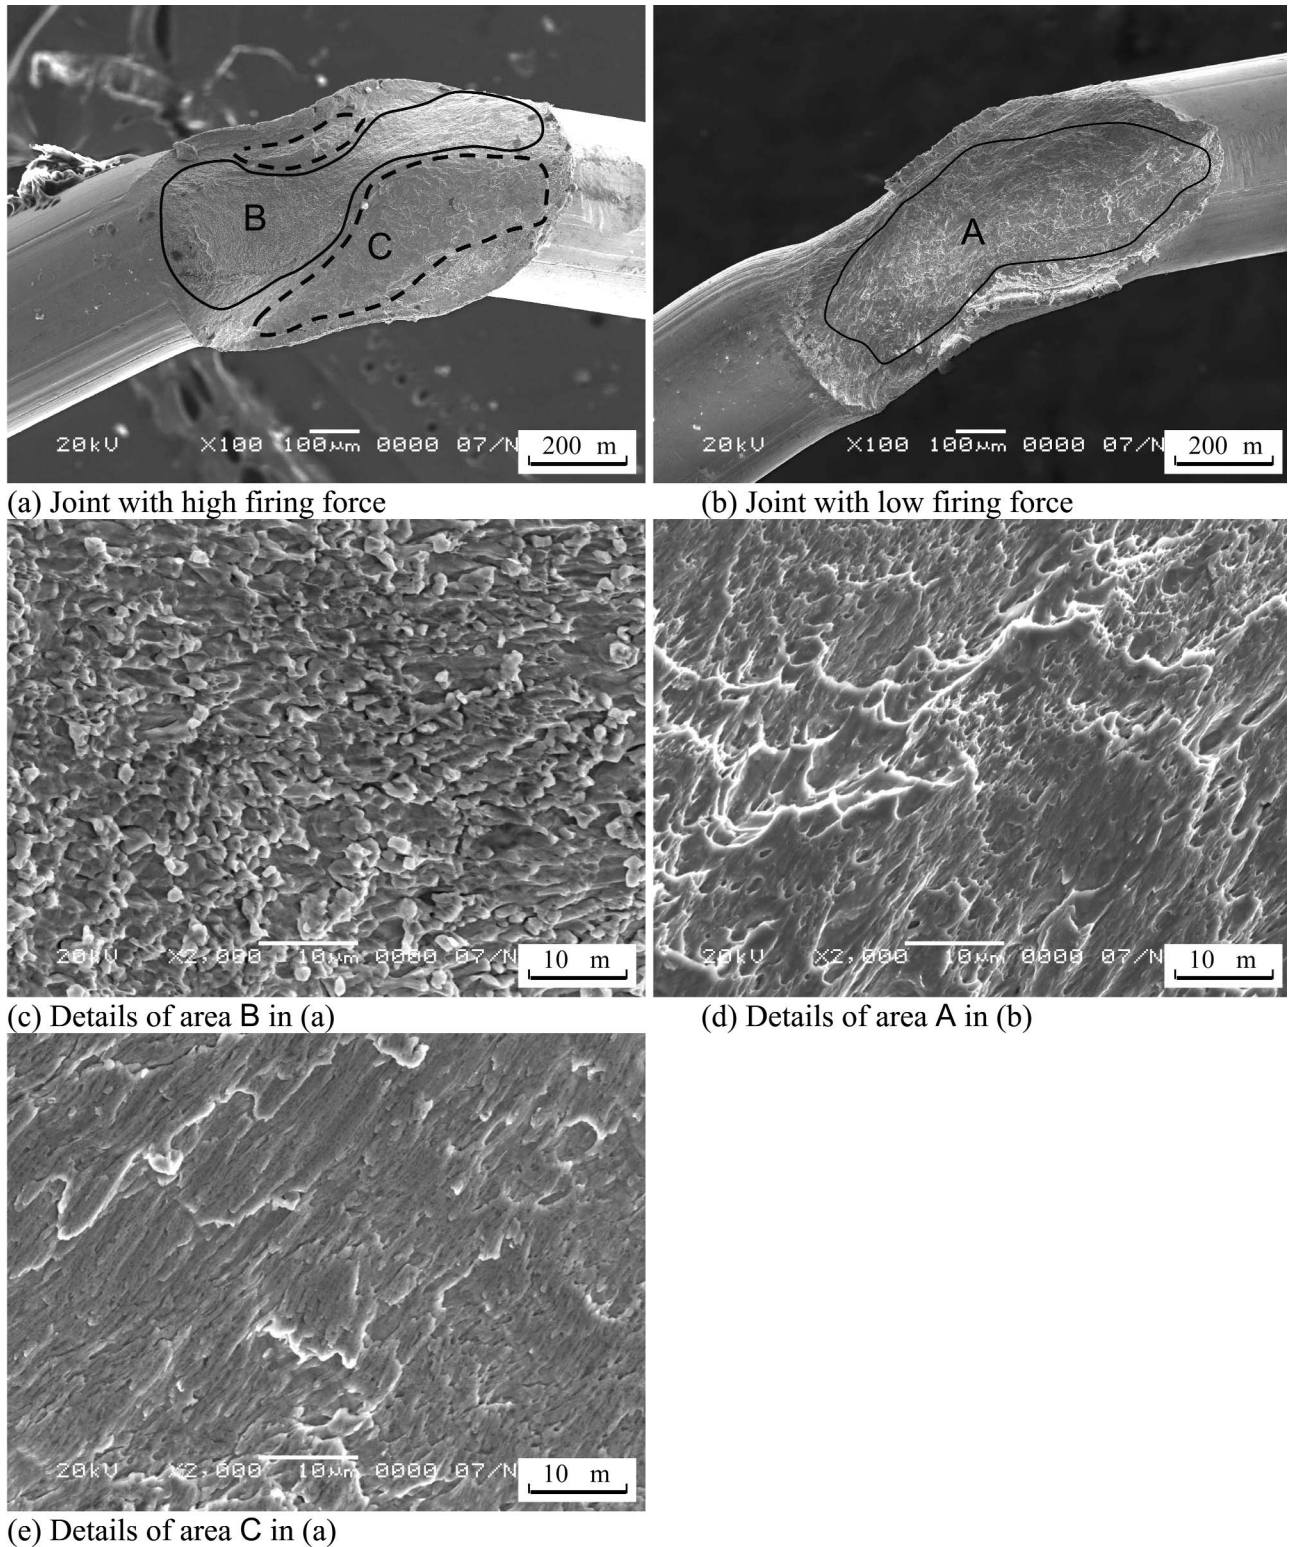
Fractured surfaces of joints made with (a) high firing force of 5.8 kg and (b) low firing force of 1 kg. Both joints had welding force of 6 kg. (a) Joint with high firing force. (b) Joint with low firing force. (c) Details of area B in (a). (d) Details of area A in (b). (e) Details of area C in (a).
